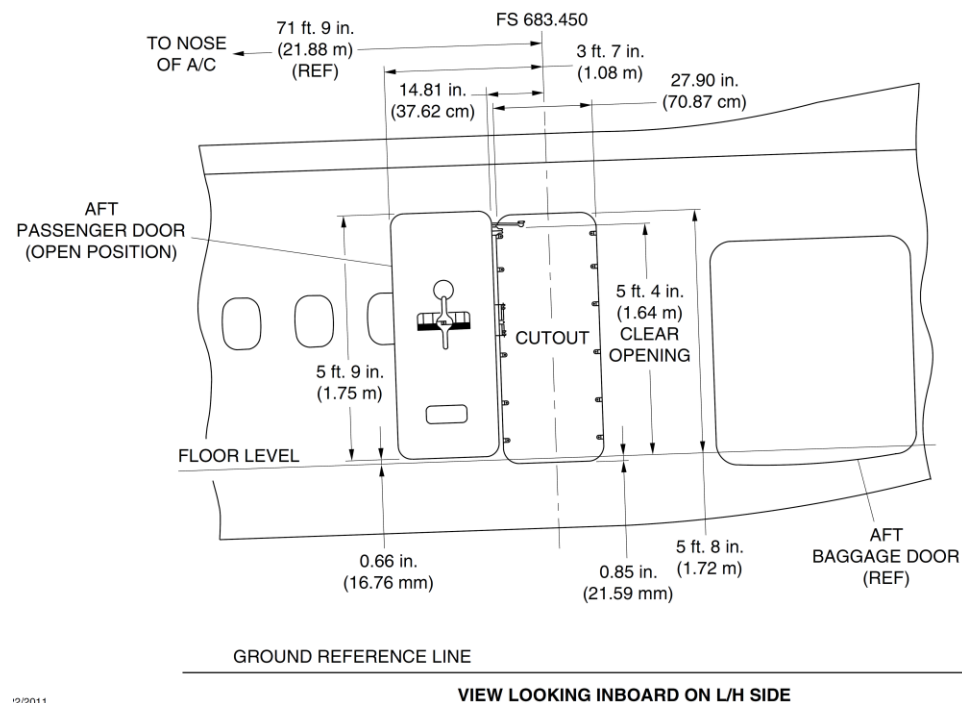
Aft Passenger Door – Detailed Dimensions
